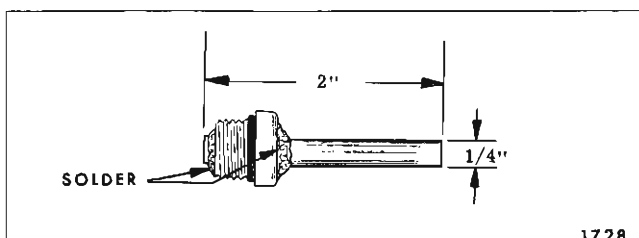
I-69 — Reservoir Filler Plug Adapter
